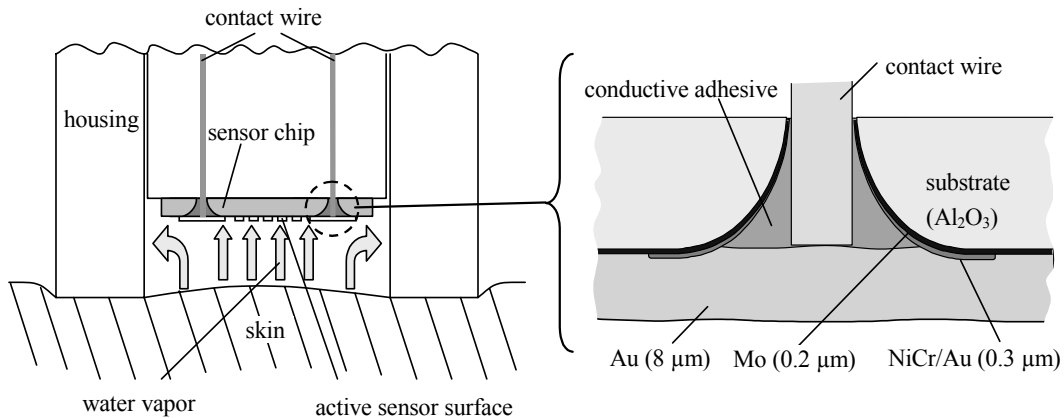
Schematic cross sectional view of the TEWL-sensor with closed measuring chamber (increasing concentration of water vapor in the chamber after touching the skin). The funnel-shaped holes are produced by a special laser drilling process. The thick gold layer is deposited by electroplating.
